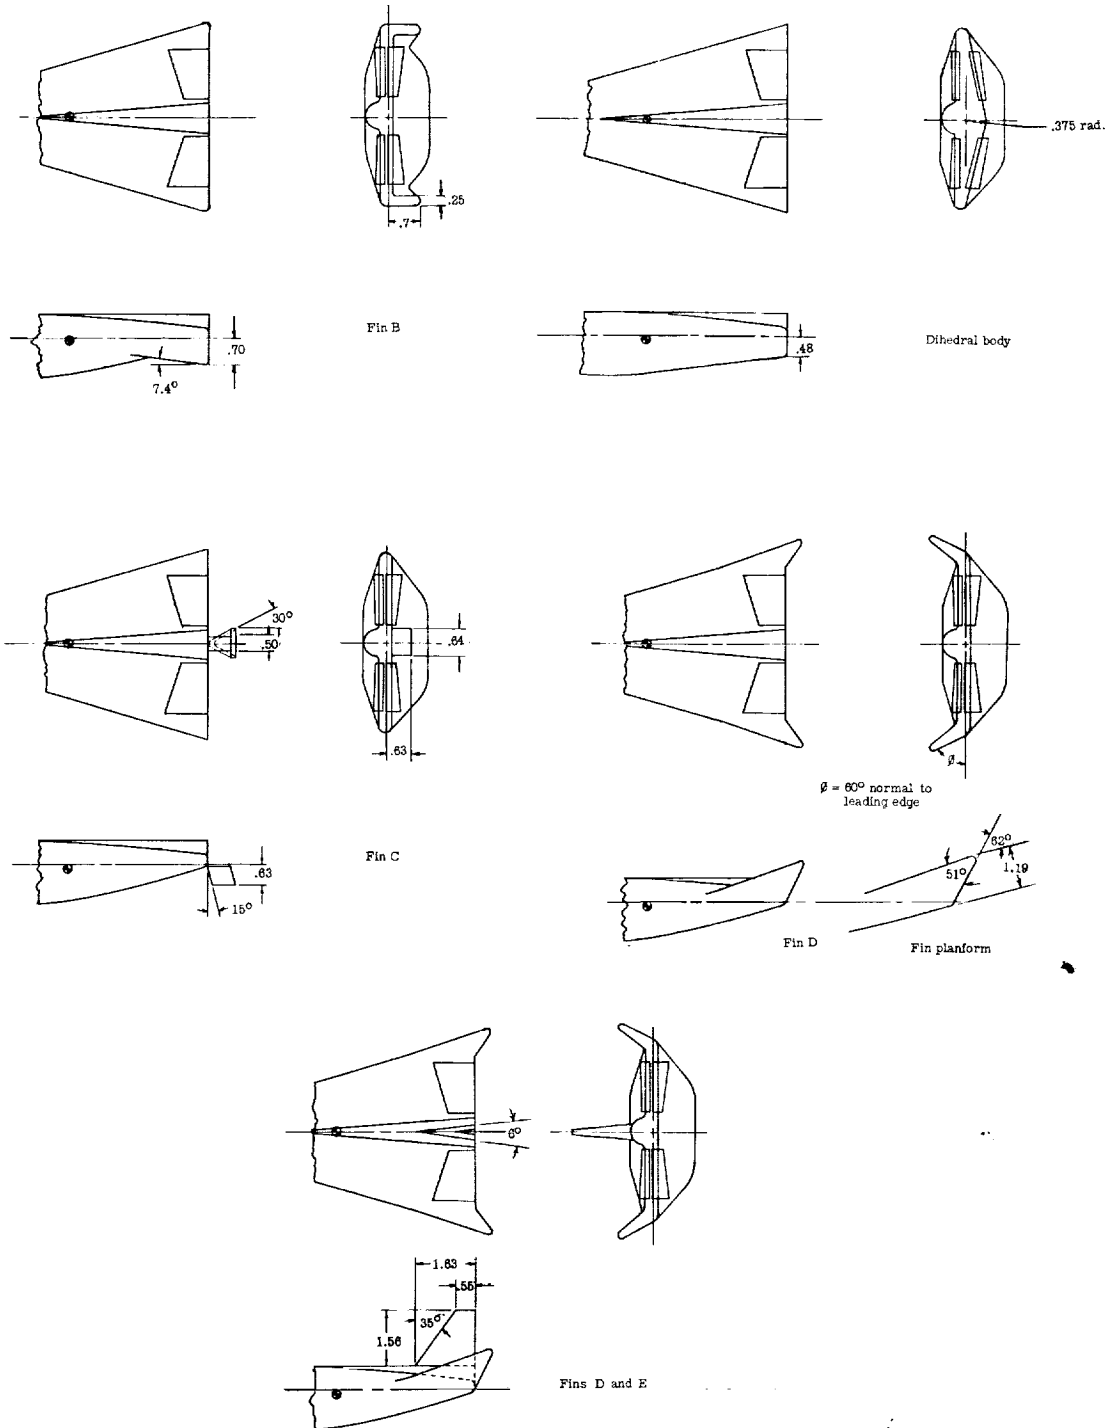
Model drawings and dimensions of HL-10. All linear dimensions are in inches.
